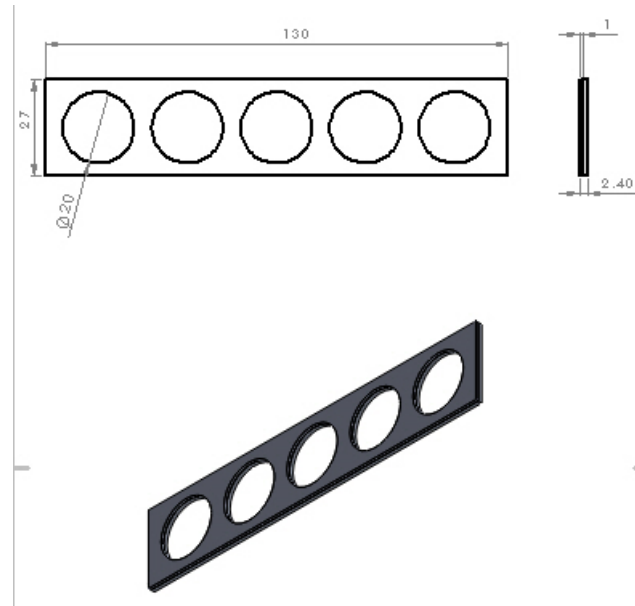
DP Explosive welding steel with specific dimensions.
